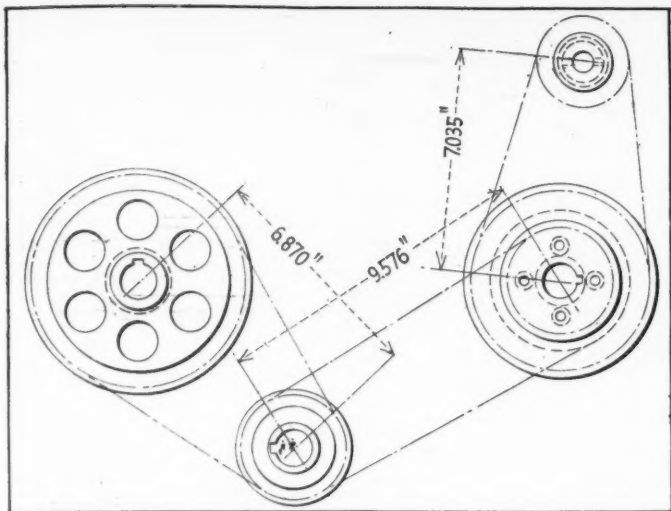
Schematic view of chain drive used for actuating the sleeve-eccentric and magneto shafts
